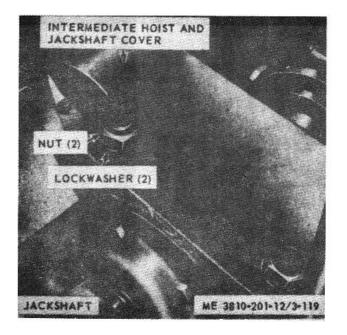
Intermediate hoist and jackshaft cover, removal and installation.
